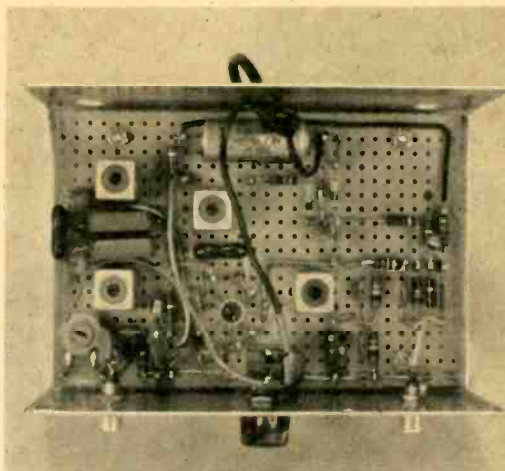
Top view of adaptor shows circuit board installed in cabinet. Wire at top comes from 6-VDC power supply that plugs in AC outlet. Power switch, input and output jacks are on front panel.
